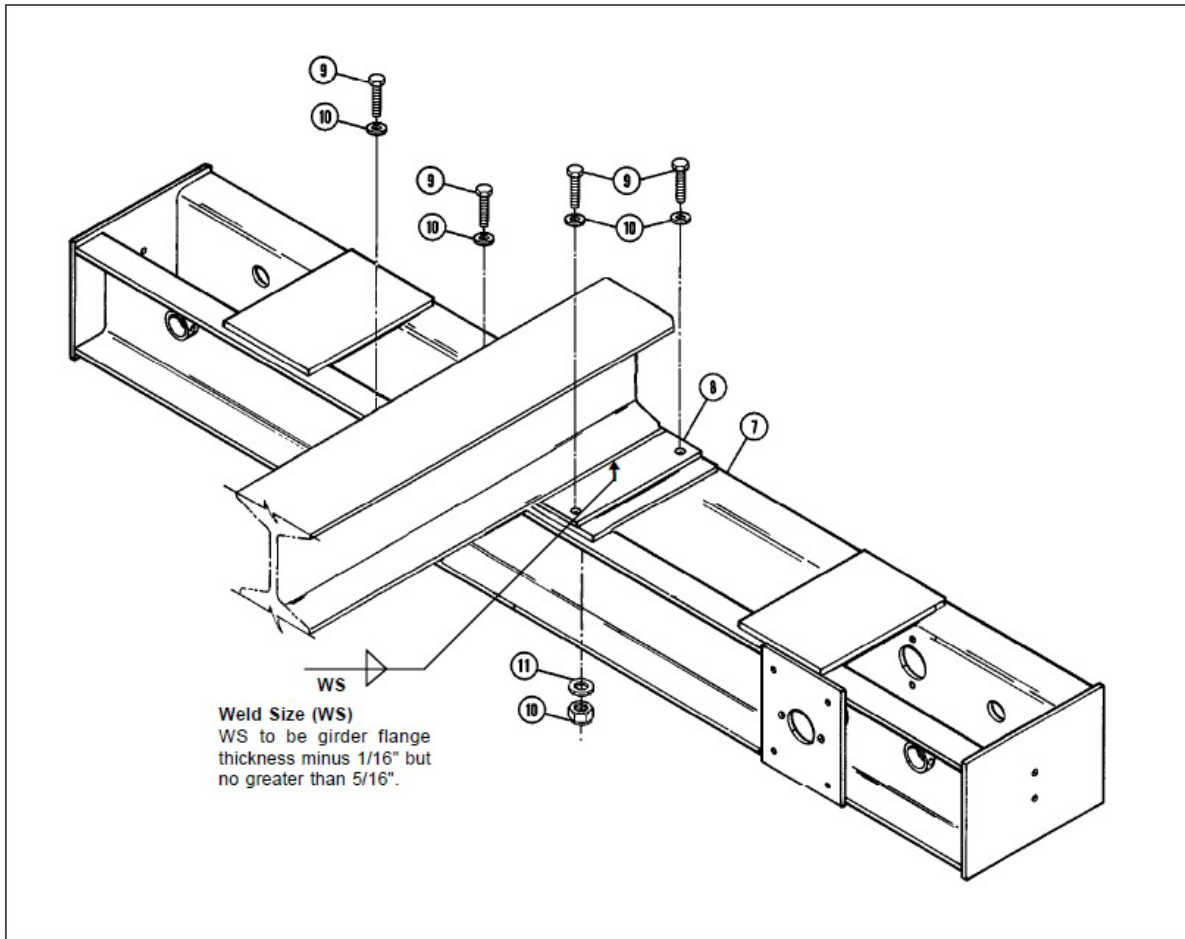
Bolted Uncoped Girder Connection (Only 1 Connection Shown)
